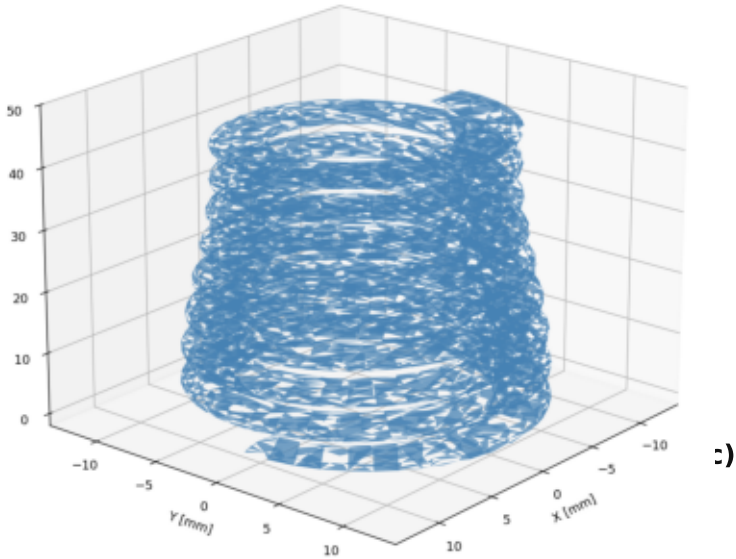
053 05 00 | Intake Valve Spring (Beehive)
